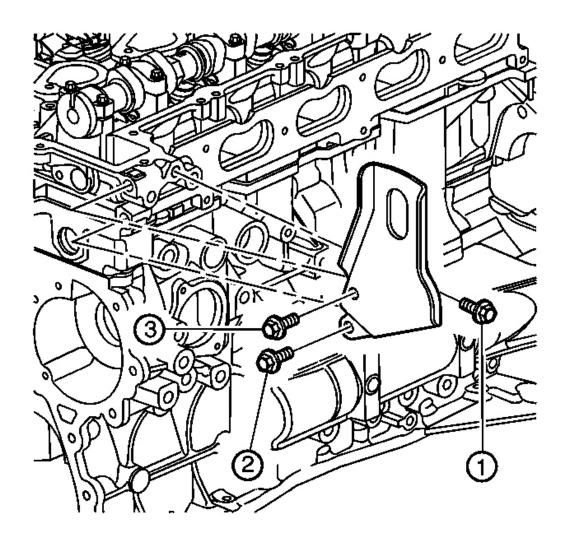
Installing Engine Lift Bracket Courtesy of GENERAL MOTORS CORP.
